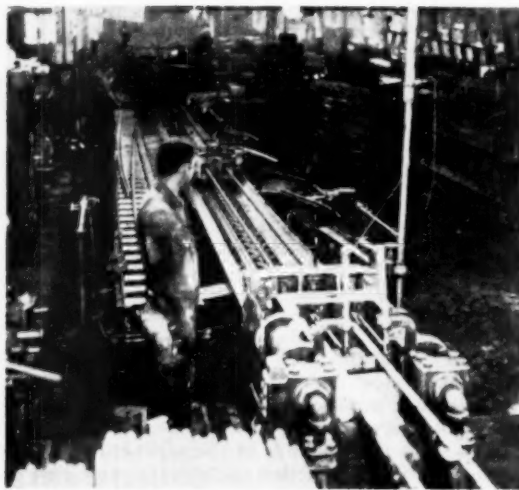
MODERN DRAWBENCH DRAWING DOUBLE
